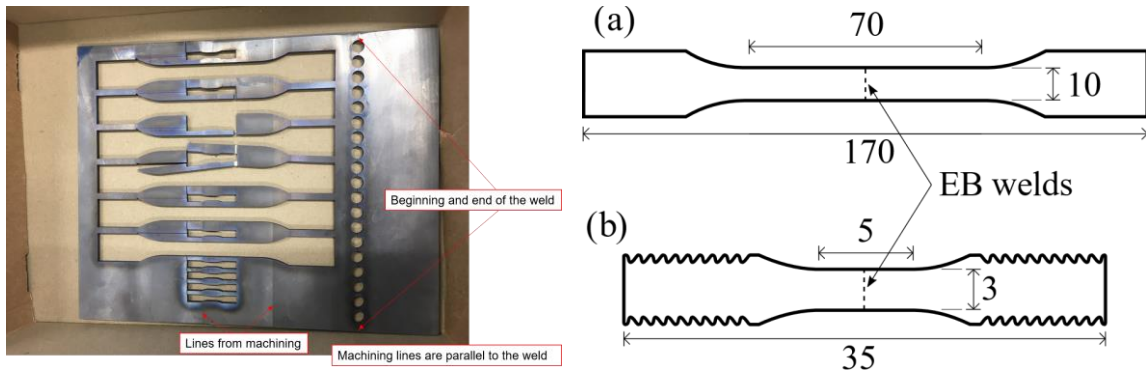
Electron beam welded niobium sheet after the specimens were cut (left) and adopted geometries and dimensions (in mm) of the specimens for the tensile tests (right).
